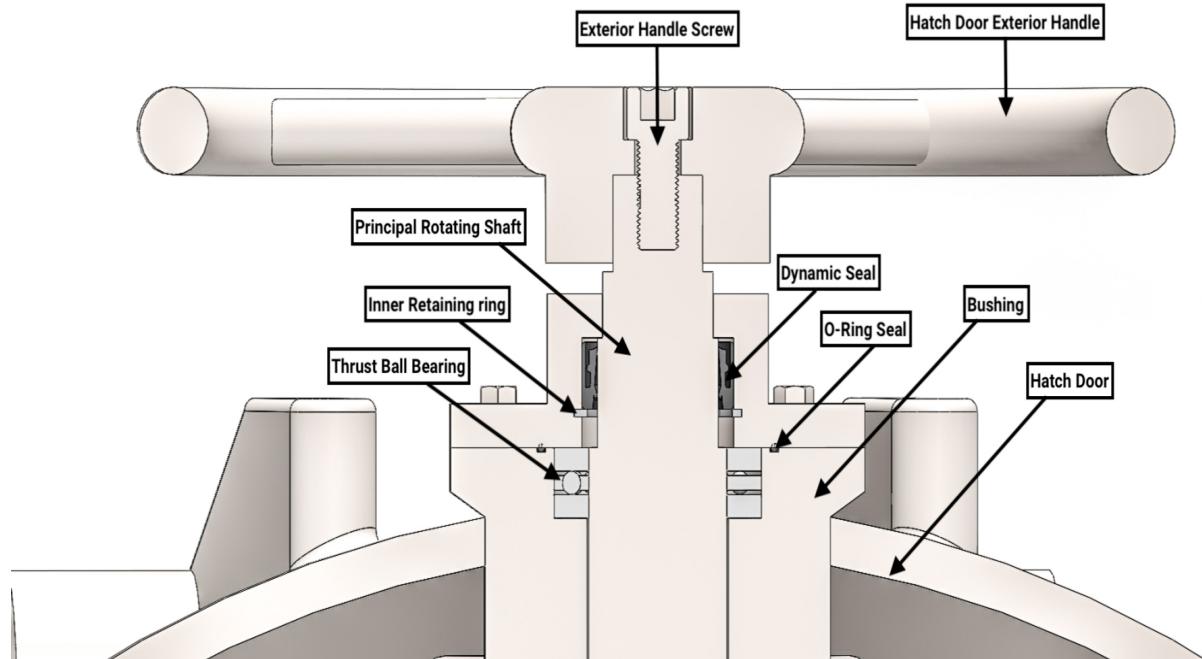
Cross-Sectional View of Hatch's Locking and Sealing Mechanism
